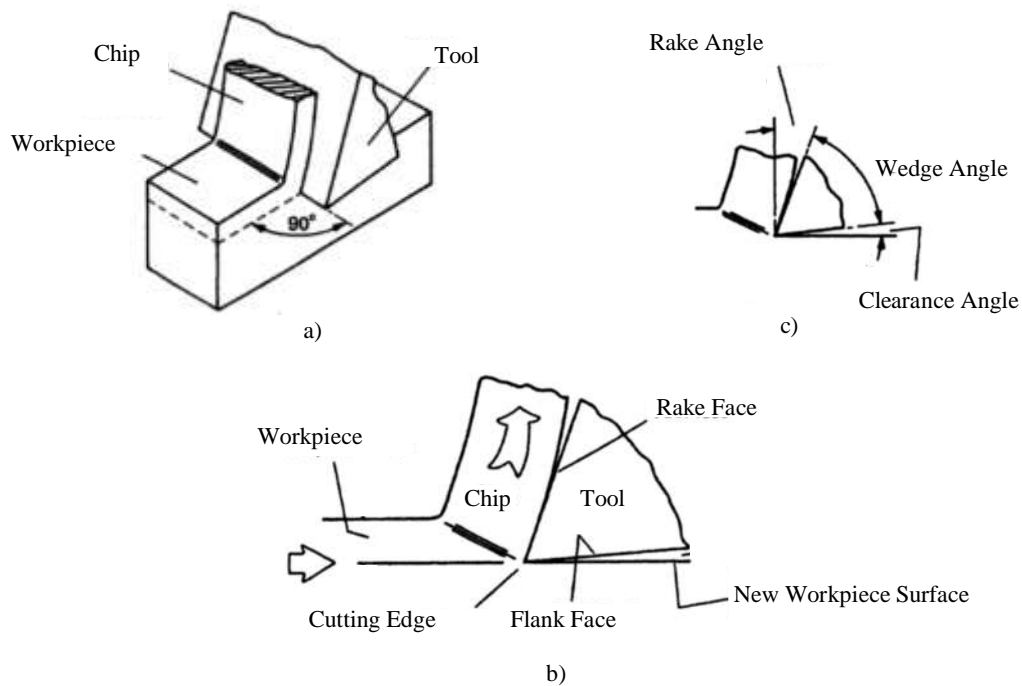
Orthogonal Cutting: a) Model b) Surfaces and parts c) Angles;
